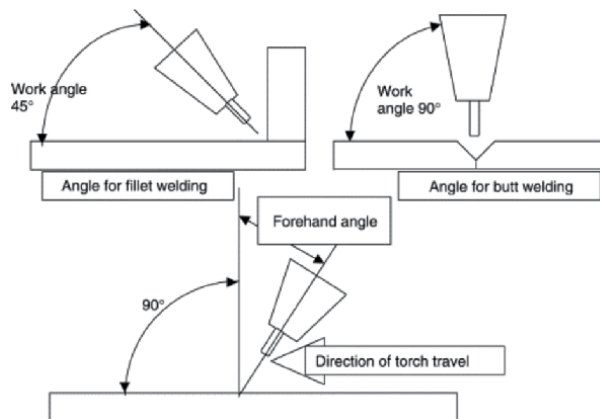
Welding speed, torch angles, and orbital angle (adapted from [10]).
